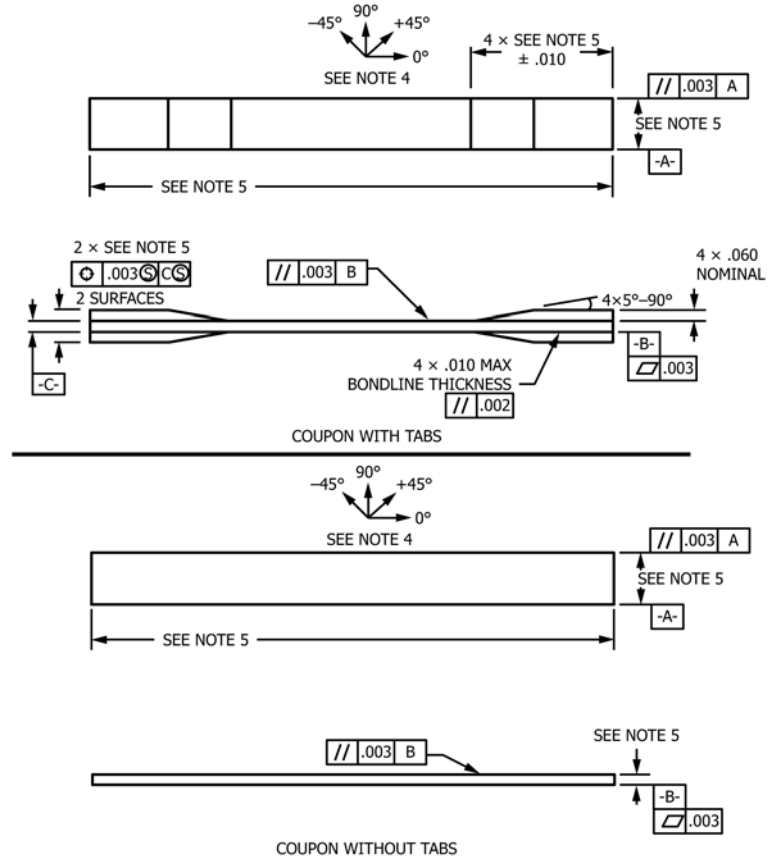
Tension Test Specimen Drawing (inch-pound)
